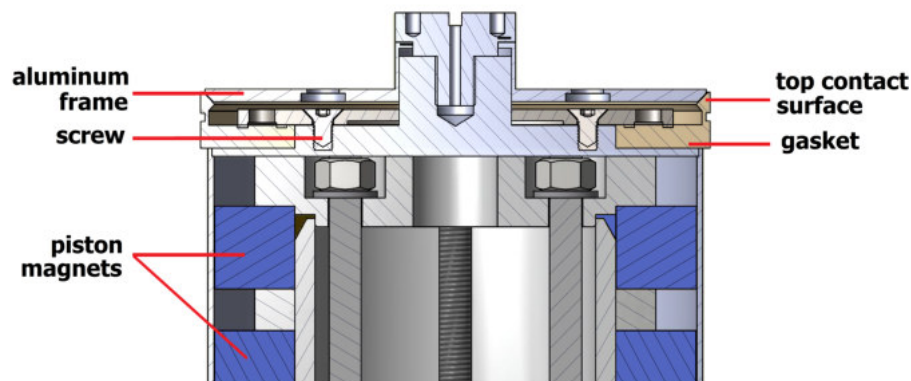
CAD drawing of the piston. The gaskets contain two contact surfaces. Drawing by C.Huhmann.
